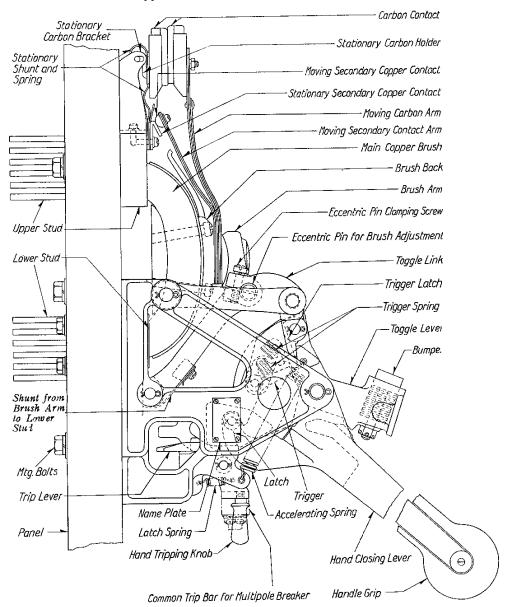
Outline of a 2400-3000 Amp. D-C., Type CL Trip Free Carbon Circuit-Breaker, Without Overload Trip, Showing the Principal Parts
